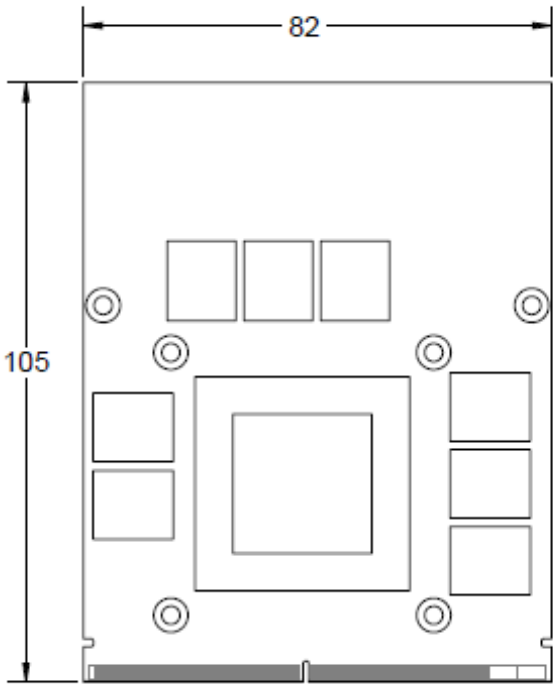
EGX-MXM-AD5000 mechanical dimensions
